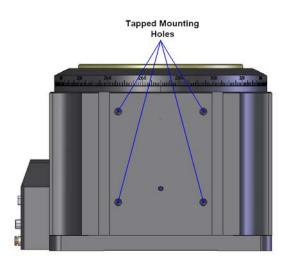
Side View of an ABRT-200 Stage Showing Tapped Mounting Holes
